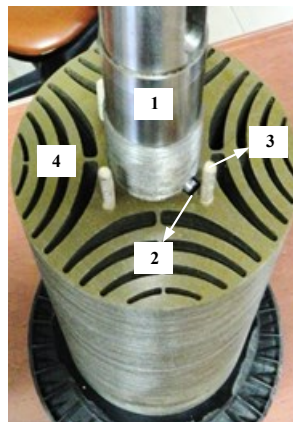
CRNGO rotor assembly. (1) Rotor shaft. (2) Keyway. (3) PEEK stud. (4) Lamination.
